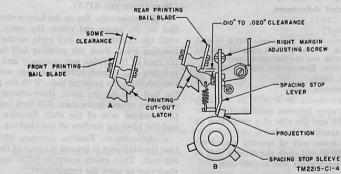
(Added) Printing cutout latch and spacing stop mechanism.
